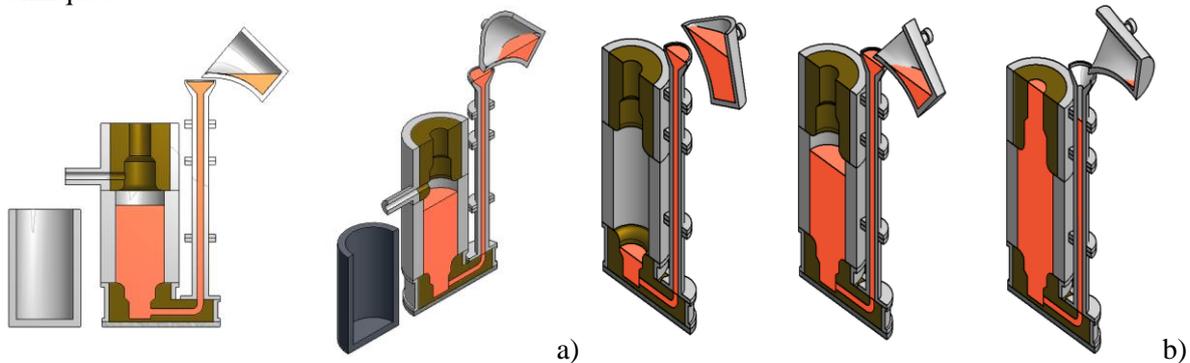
The rolls' casting technology: a) the casting equipment; b) the casting phases
